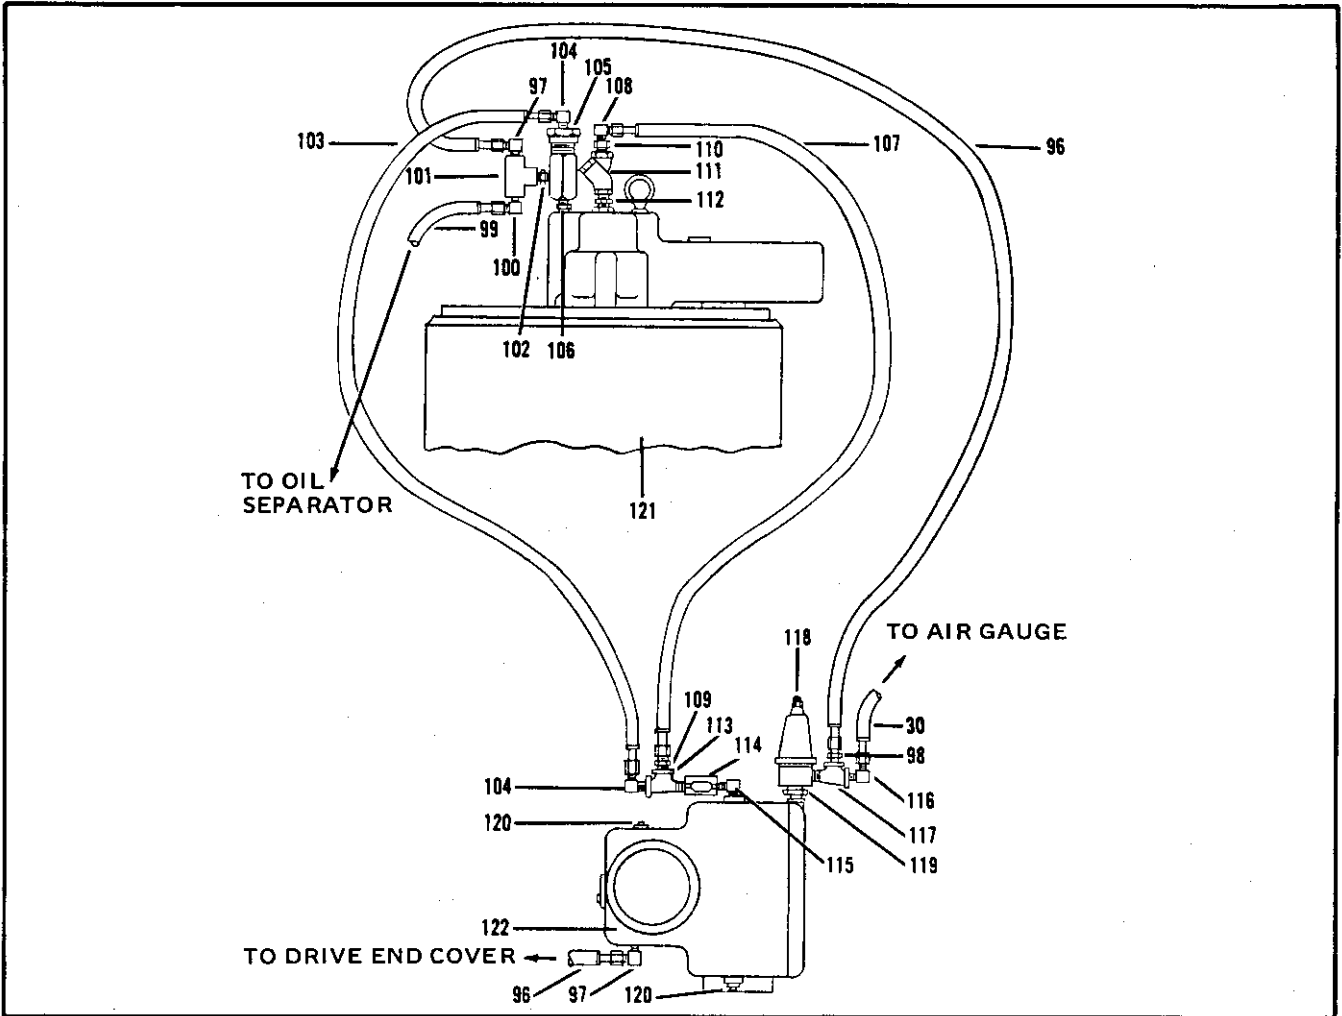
Compressor unit assembly, Model 4M125PVC (Sheet 4 of 4)
